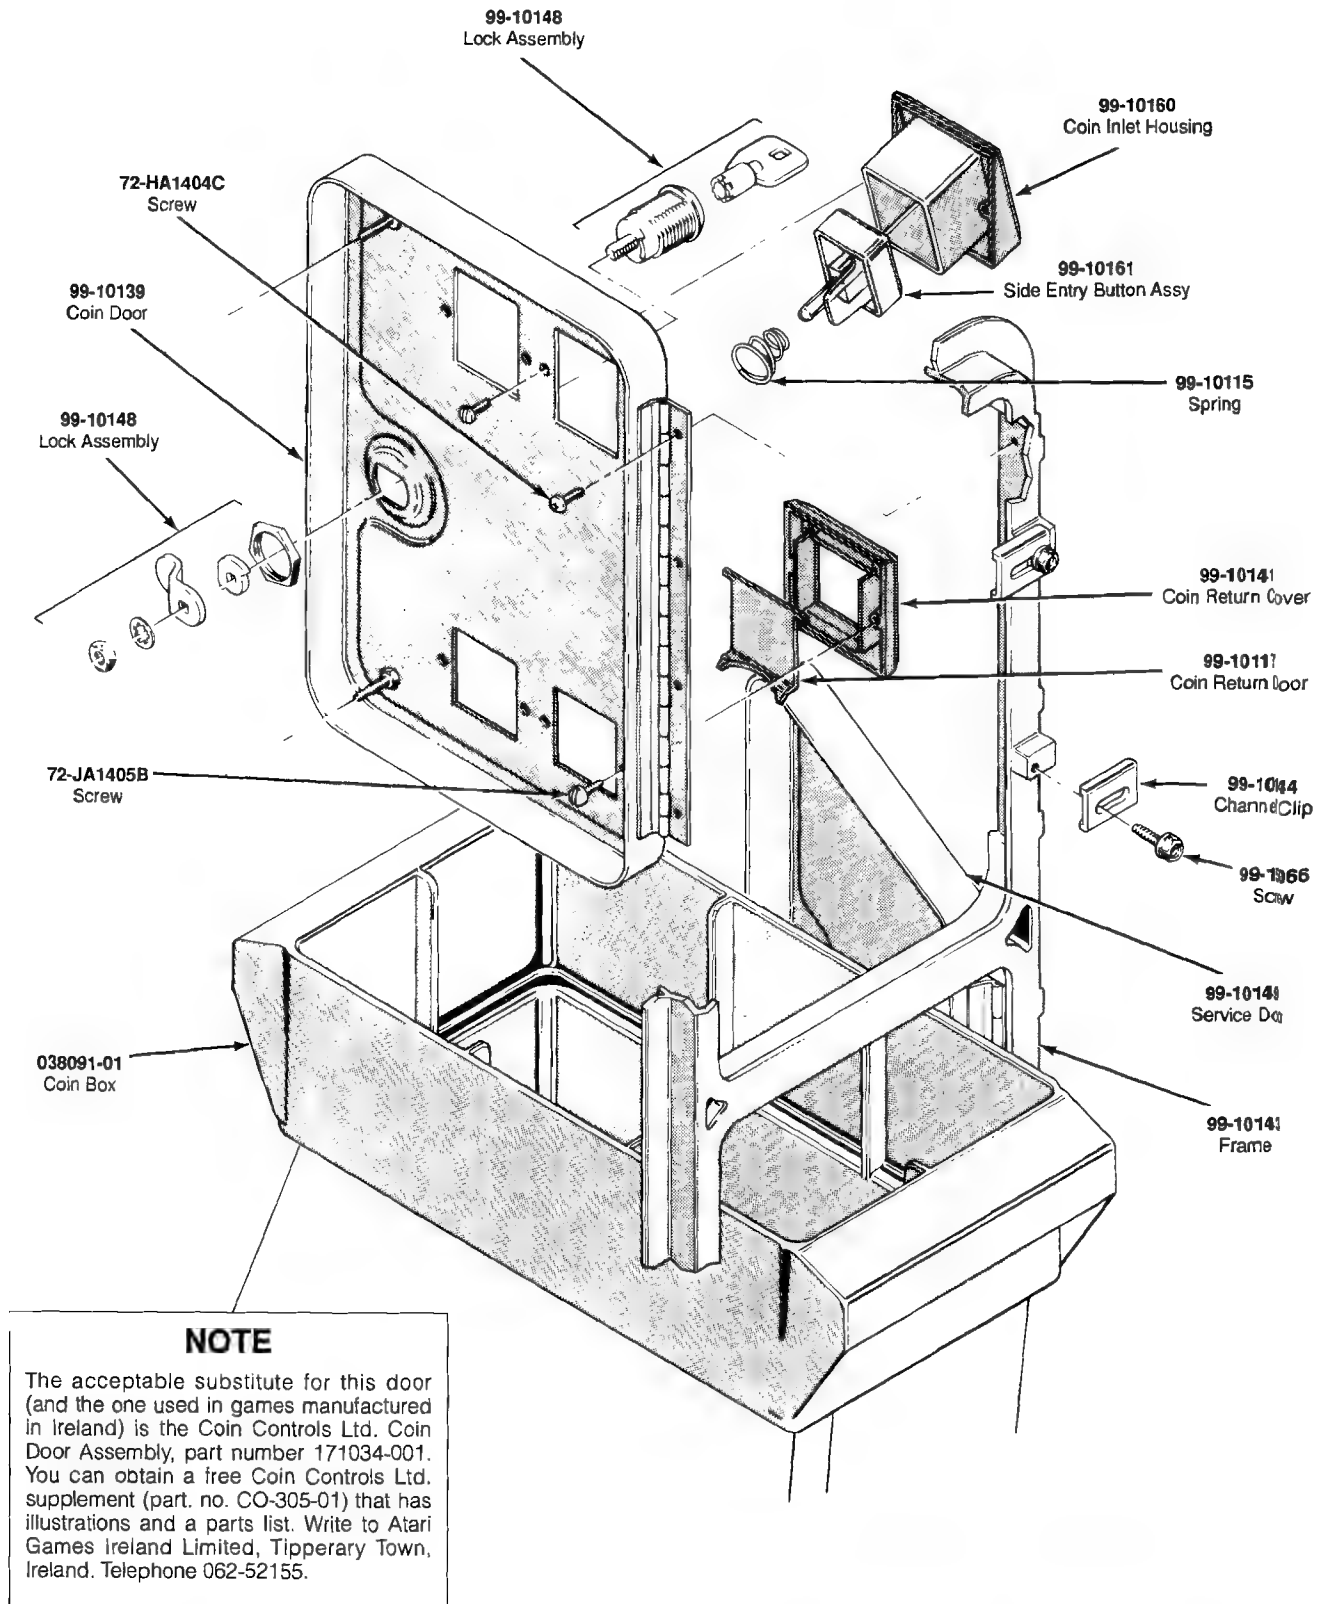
Coin Acceptors, Inc. Coin Door Assembly, Continued
